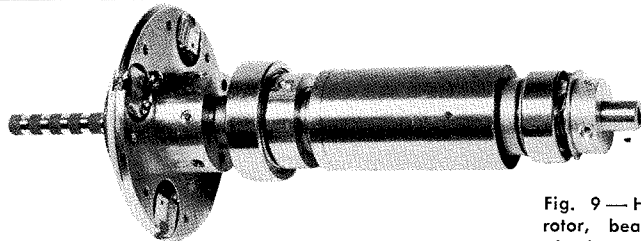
Head-wheel shaft, rotor, bearing, and tone-wheel assembly.
